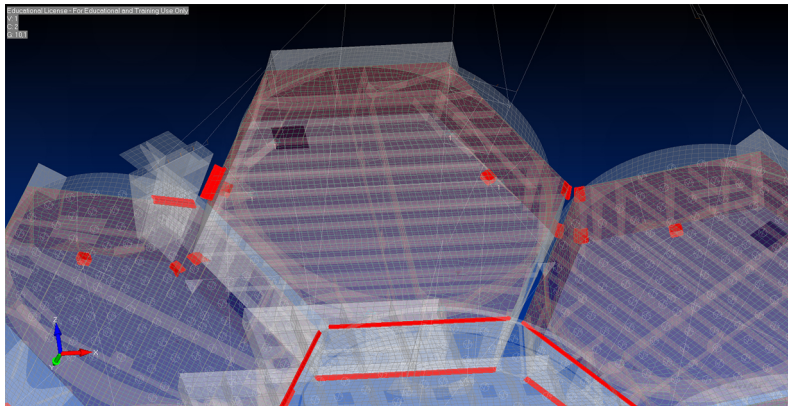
Mounting Surfaces of the M1 Cell into the CCF
